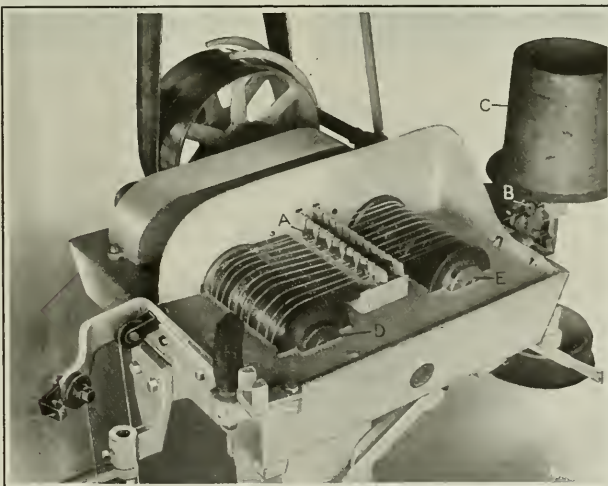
Wire-drawing Machine, showing Course of Wire during its Passage through the Dies
